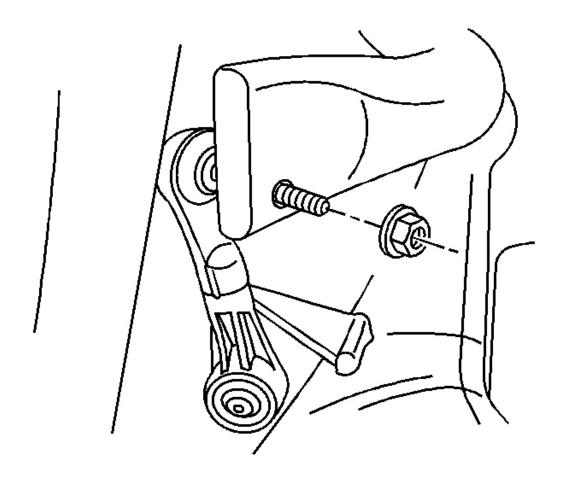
Removing/Installing Stabilizer Shaft Link-To-Stabilizer Shaft Retaining Nut Courtesy of GENERAL MOTORS CORP.
